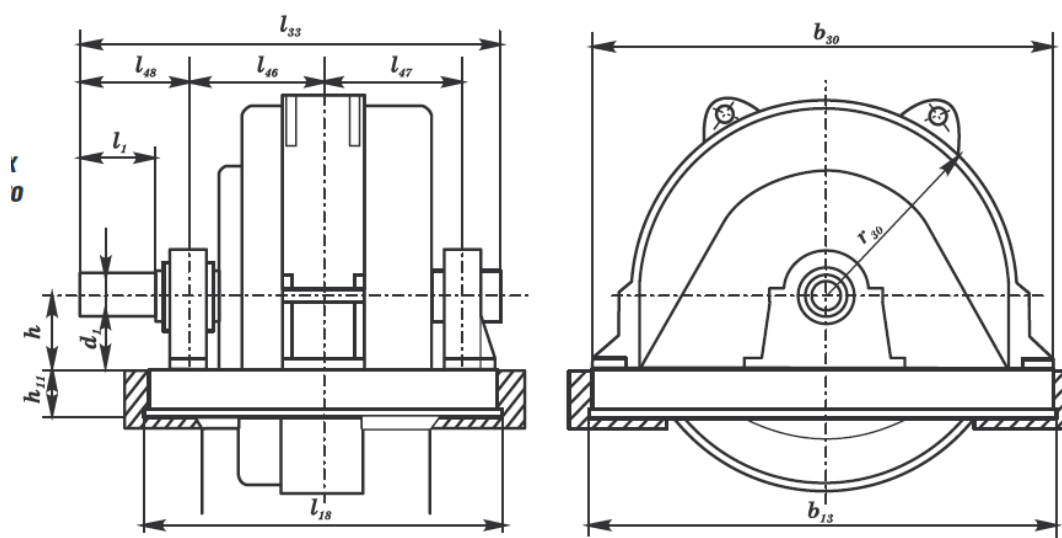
Overall and mounting dimensions of D.C. reversible motors series P2, sizes 21-25.
